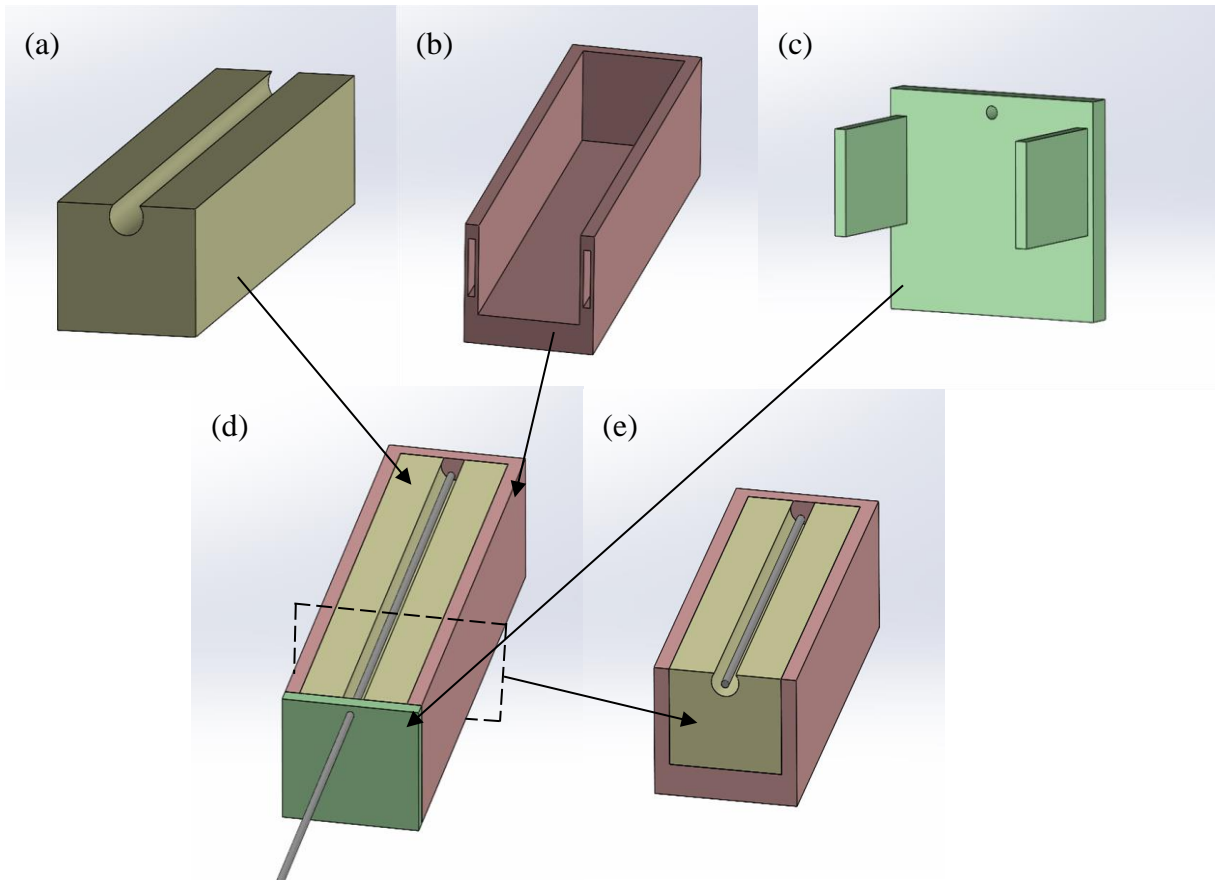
(a) PU plastic mold. (b) Main bed to hold PU plastic mold. (c) Cap that fits into the main bed with a hole near the top for the 1 mm rod to pass through and float in center of the PU plastic mold cavity. (d) Assembled mold. (e) Cross-sectional view of the mold.
